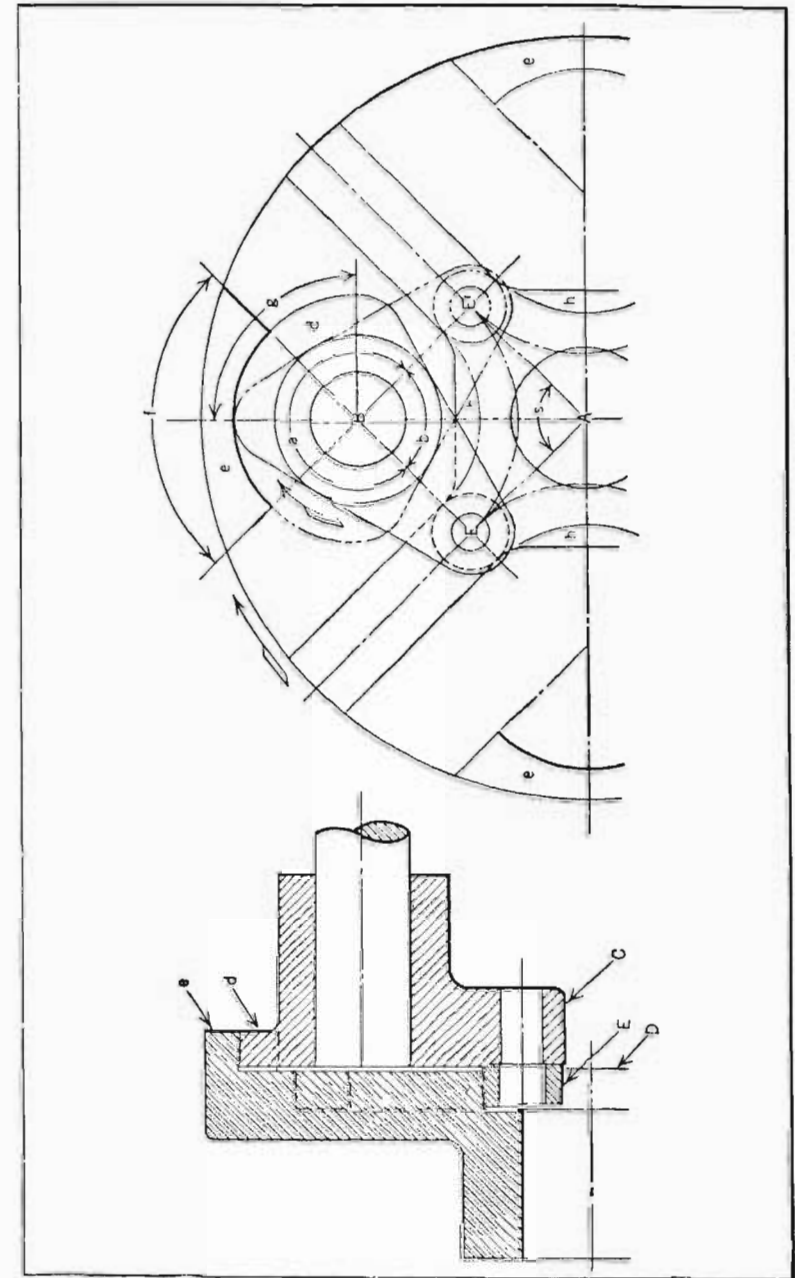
Locking Arrangement Employed on Inverse Geneva Wheel Mechanism
